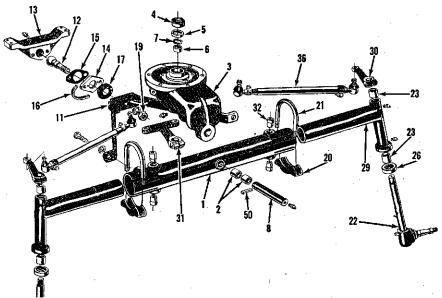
Exploded view of the adjustable front axle used on 333 and 444 tractors.
